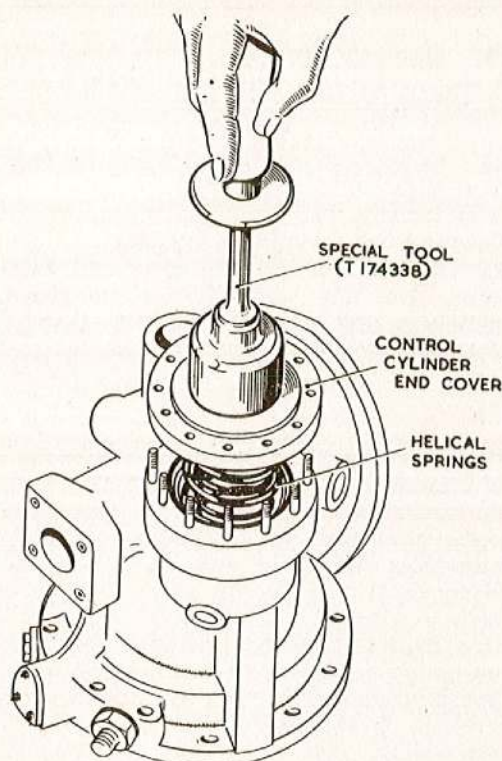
Fitting and removing control cylinder end cover, using tool T.174338
